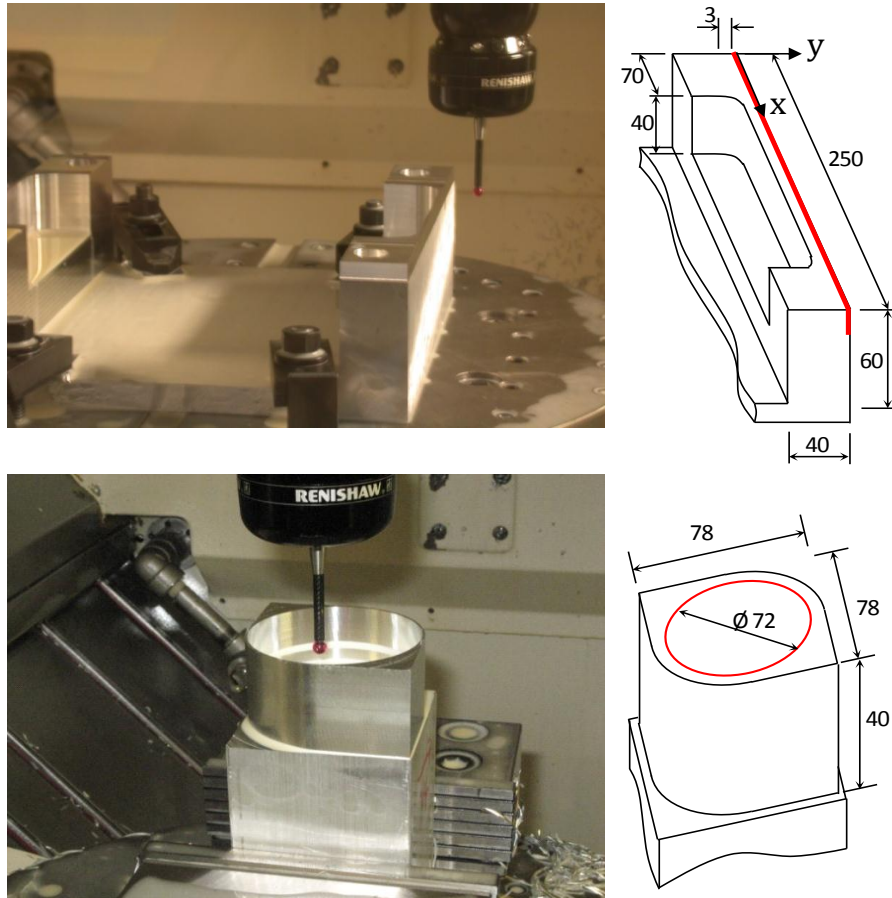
Test parts, made of aluminum, mounted on machine tool and their principal dimensions in mm.
